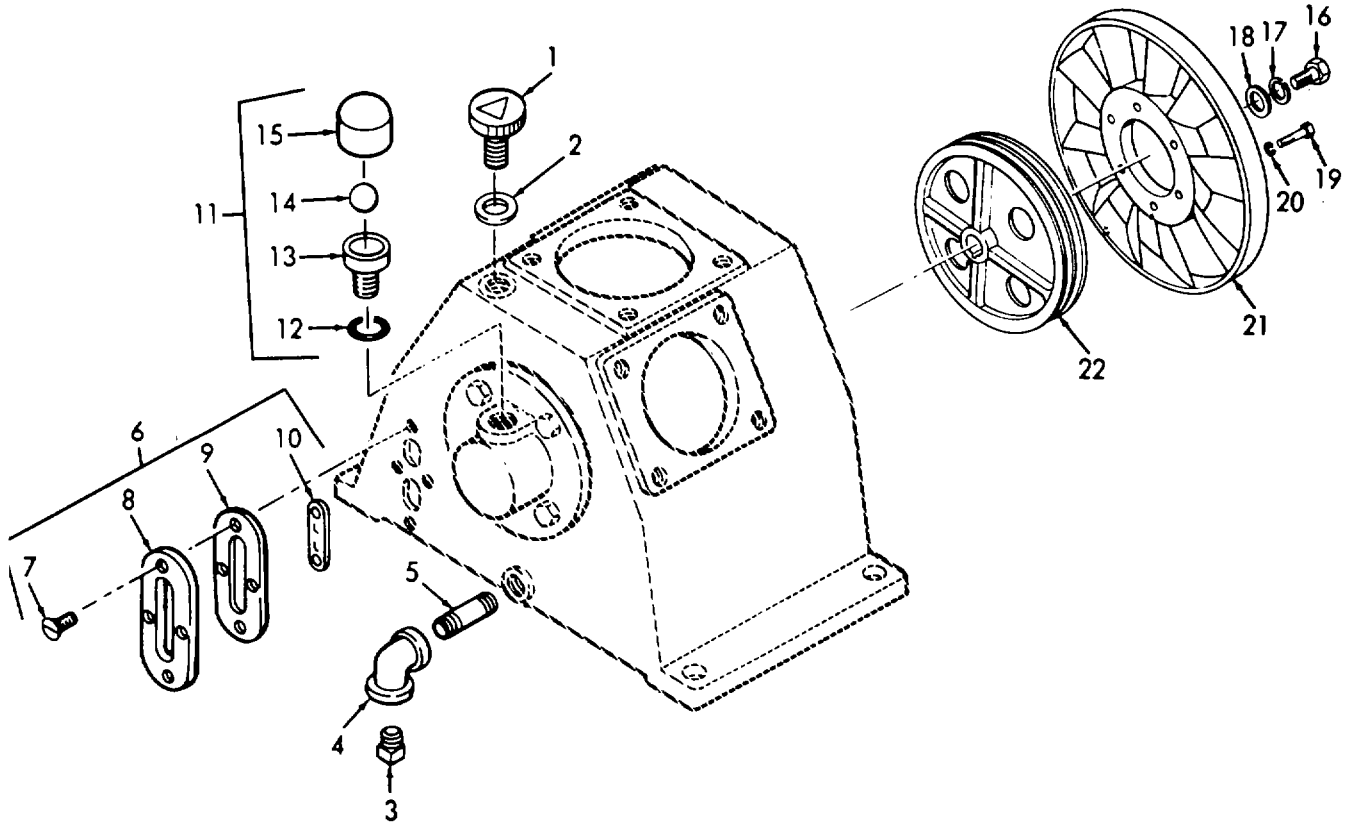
Oil Filler Cap, Plugs, Fan and Pulley.
